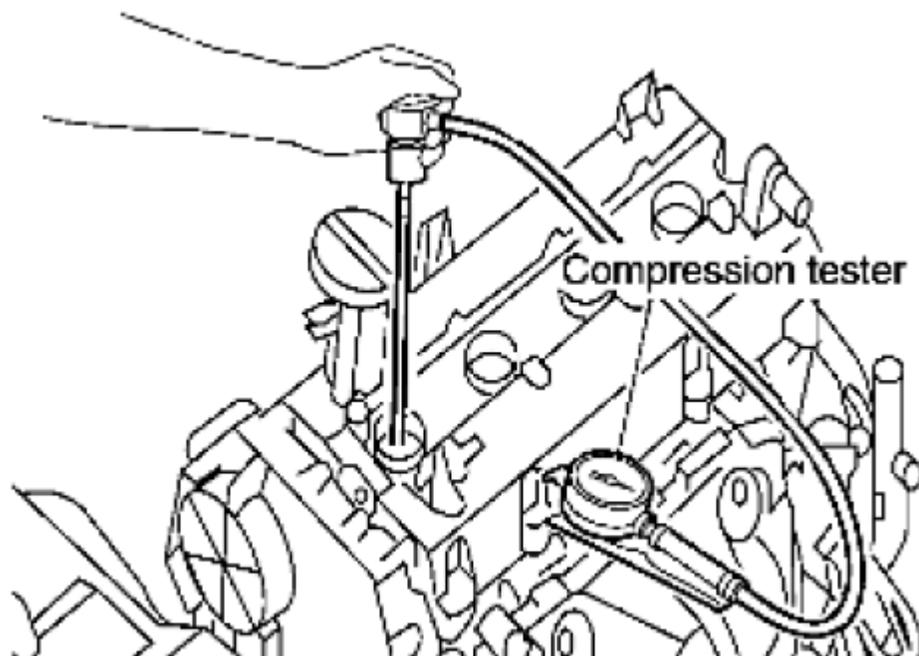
Installing Compression Tester With An Adapter Into Spark Plug Hole
